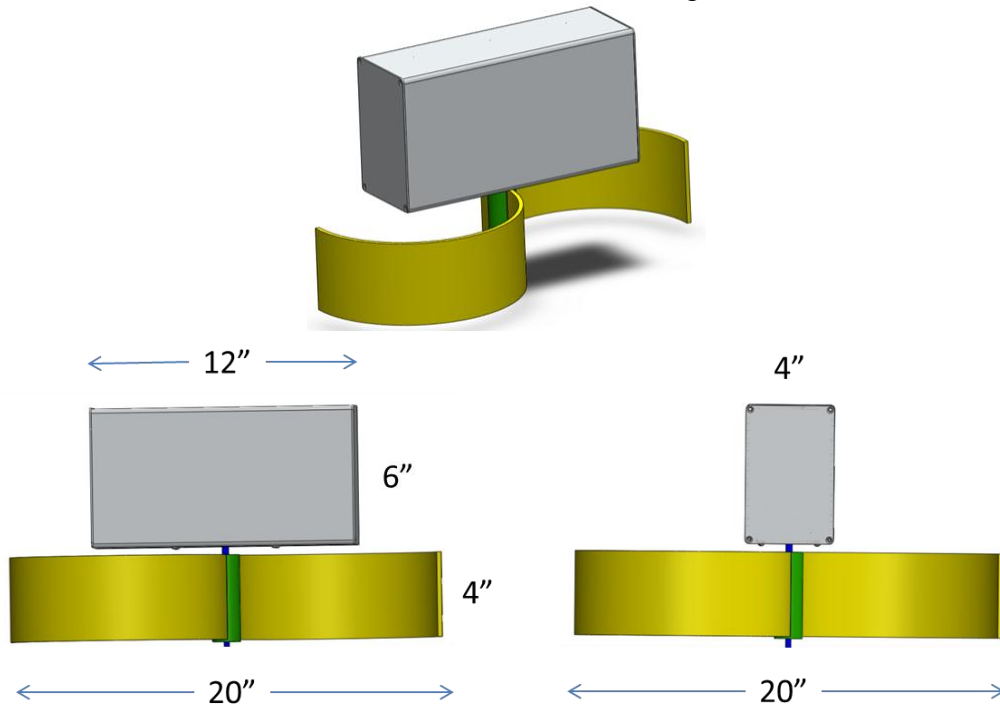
Dimensions of the wind harvester prototype without the attachment mechanism.
